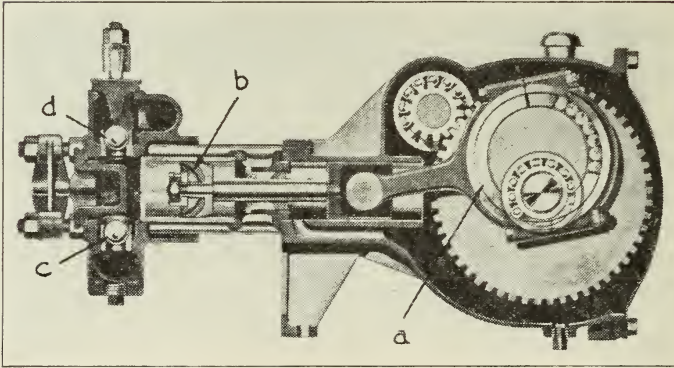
A horizontal-type pump with eccentrics (*a*), connecting-rod drive, and movable plunger-cup packings (*b*). Arrows *c* and *d* indicate suction and discharge valves respectively.
